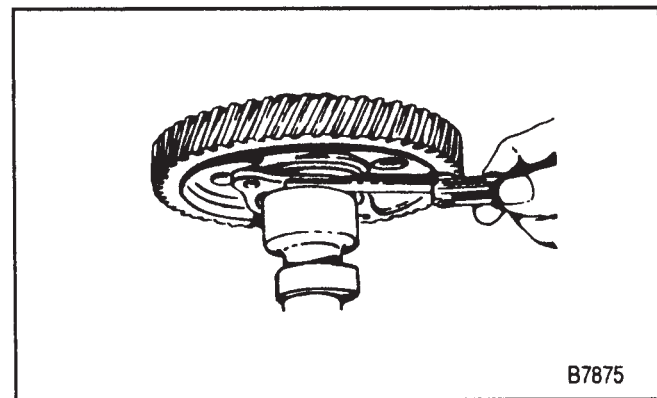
Measuring Camshaft to Thrust Plate Clearance (Camshaft End Play)
